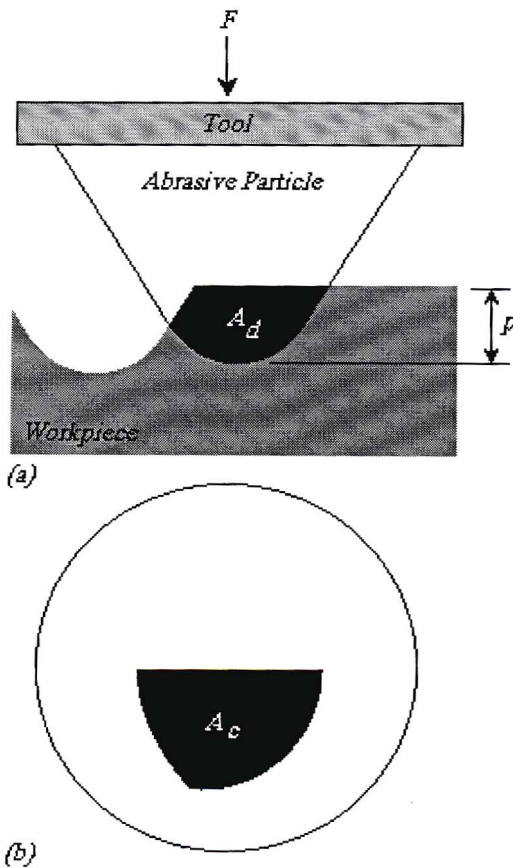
Schematic representation of an abrasive penetrating a workpiece [1]
